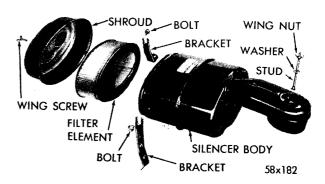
Carburetor Air Cleaner (Disassembled View)
